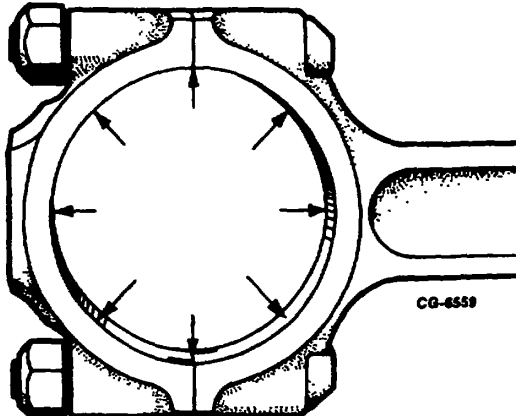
Connecting Rod Bearing Bore Out-of-Round Measurement
